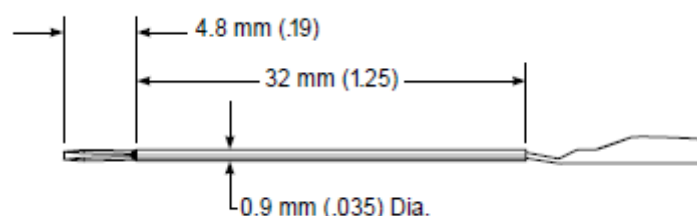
Illustrative view of hot film sensor (a detailed view is given in Figure 1.4)
